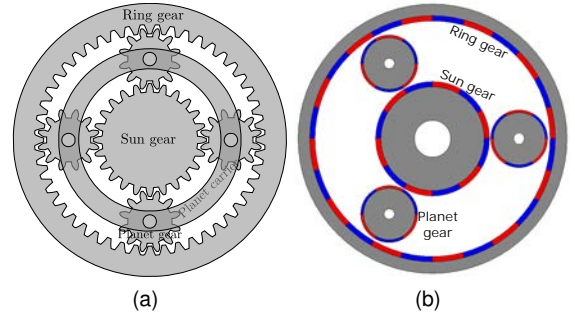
Layout of (a) a mechanical, and (b) a magnetic planetary gear.
